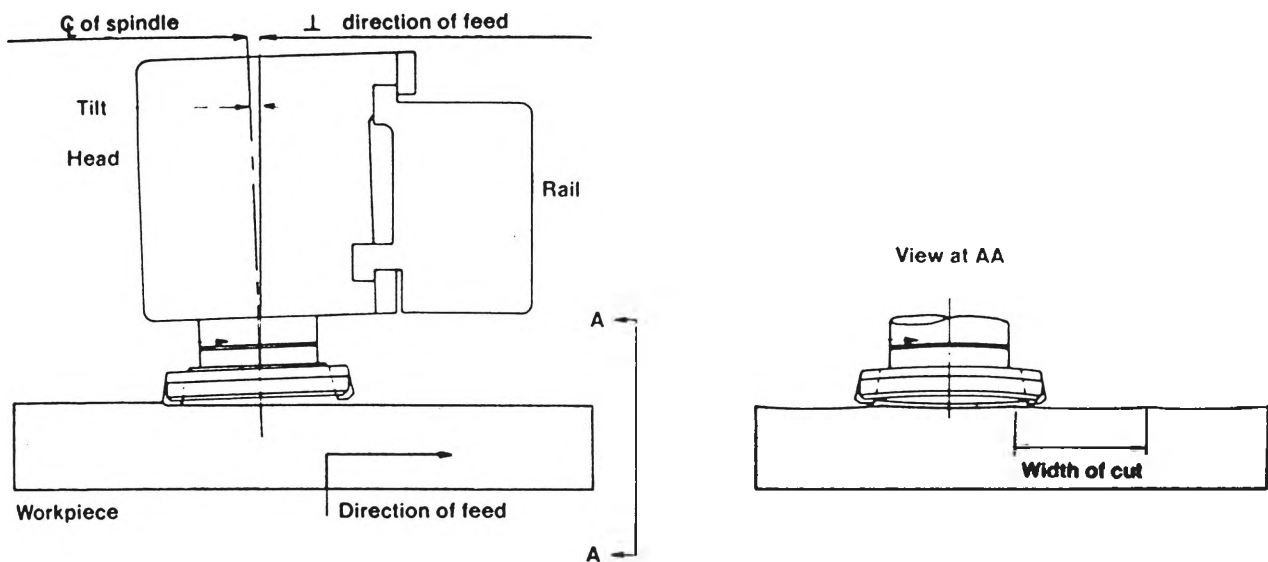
Spindle Tilt for Good Finish in Face Milling [174].
